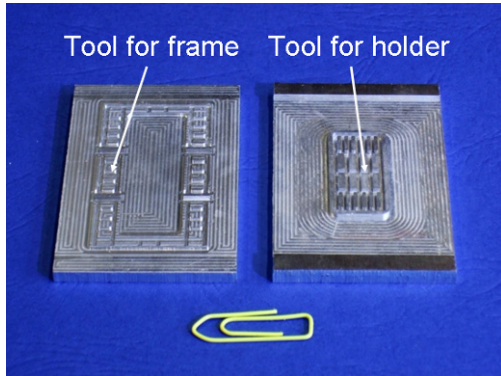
Ultrasonic hot embossing tools for frame and holder.
